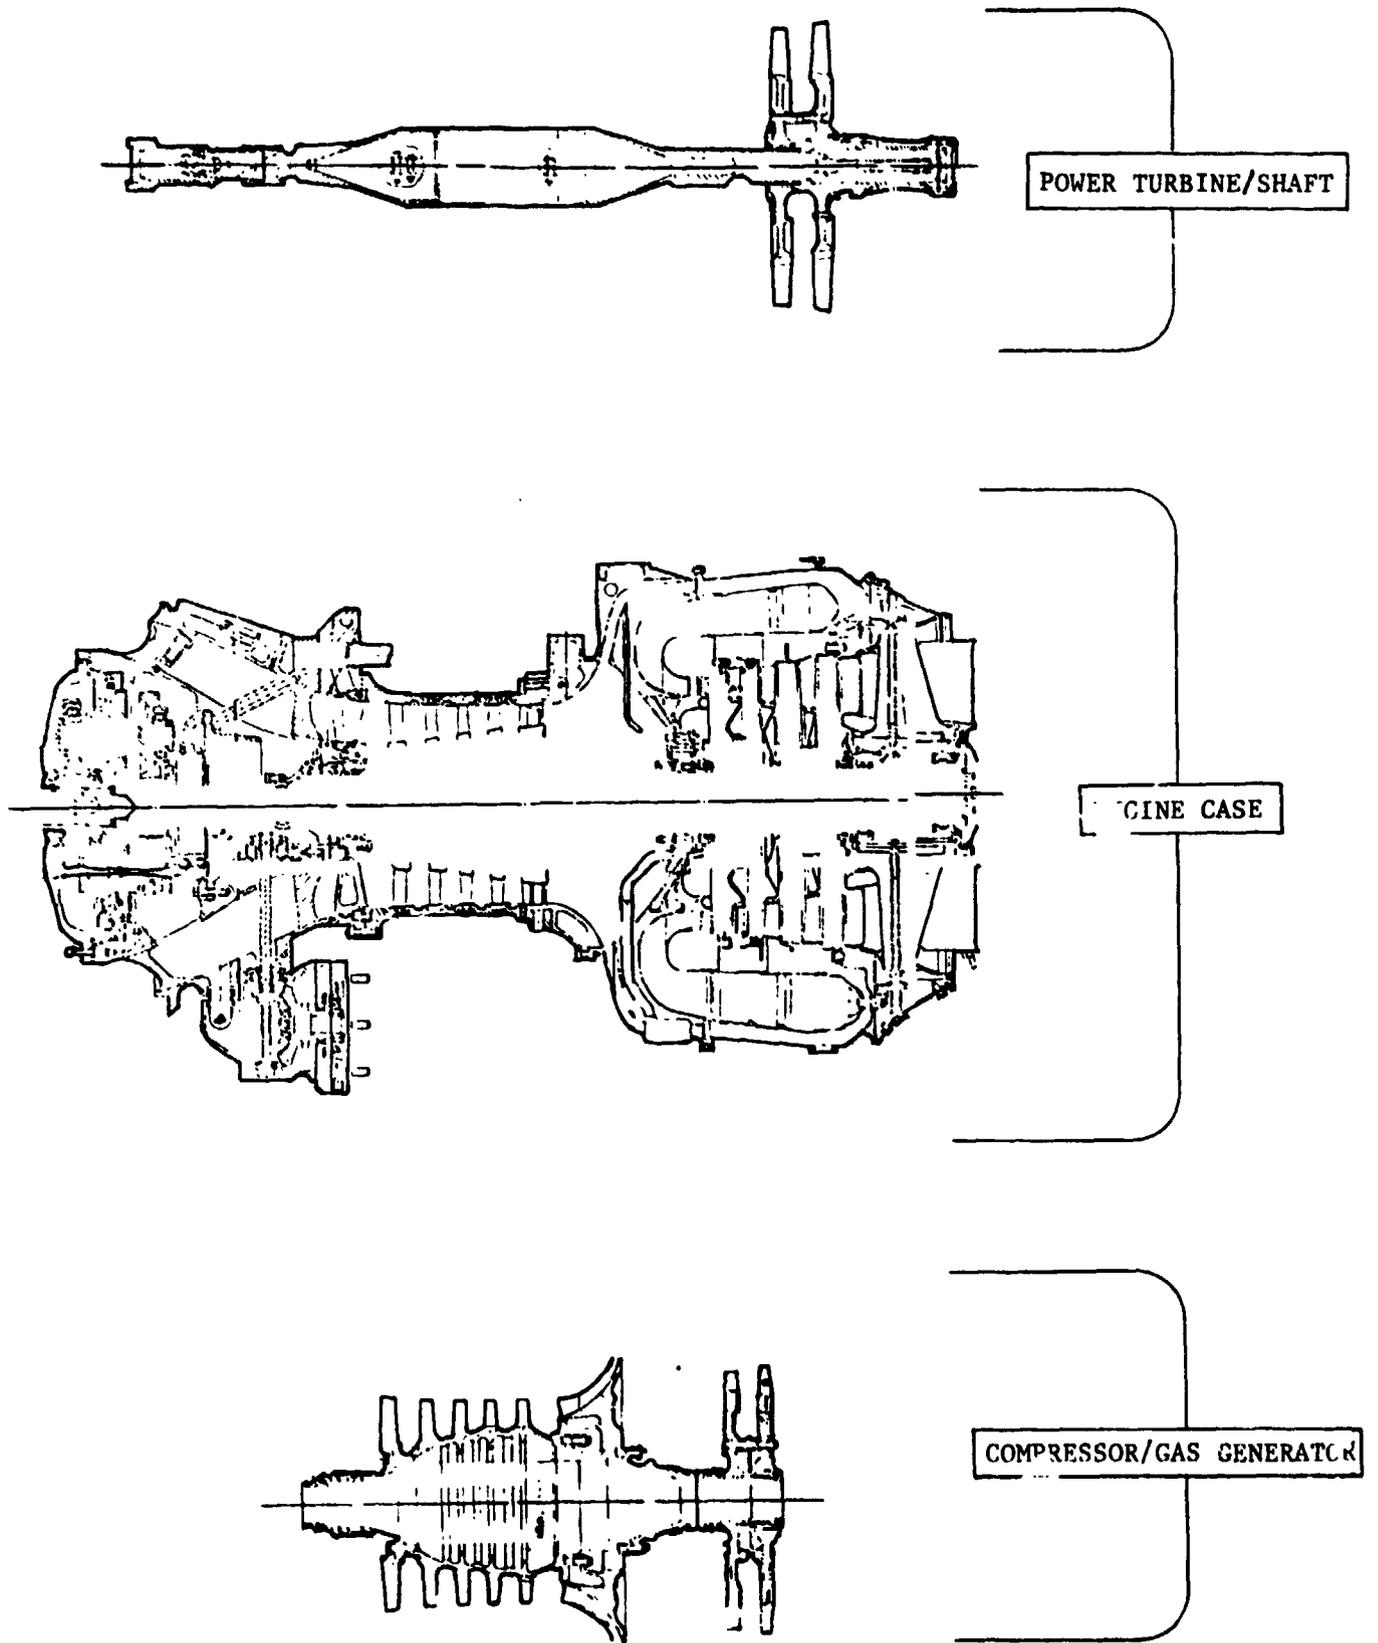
Expanded View Of Typical T53 Engine Cross-Section
